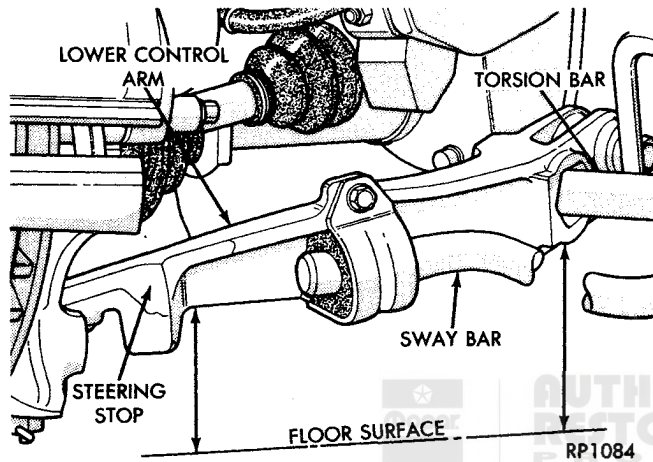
Height Measurement Points (Four-Wheel-Drive)
